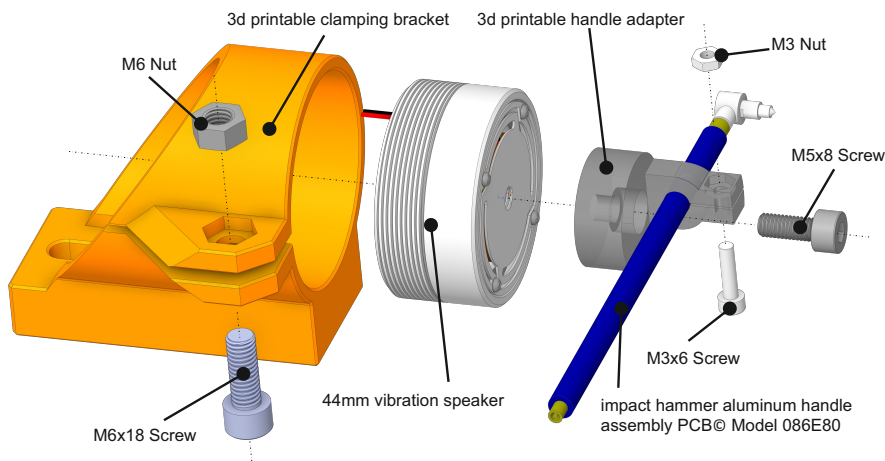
exploded view of alternative components using the 44 mm vibration speaker. In this configuration the hammer is clamped on its aluminum handle assembly [18].
